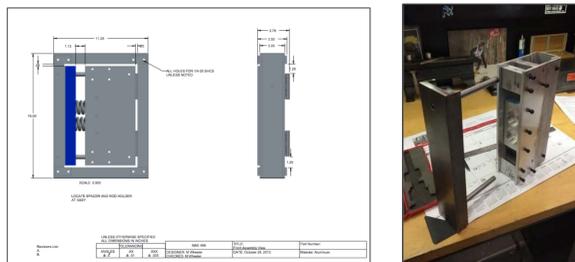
and 2: Detail Drawing and partially manufactured assembly
